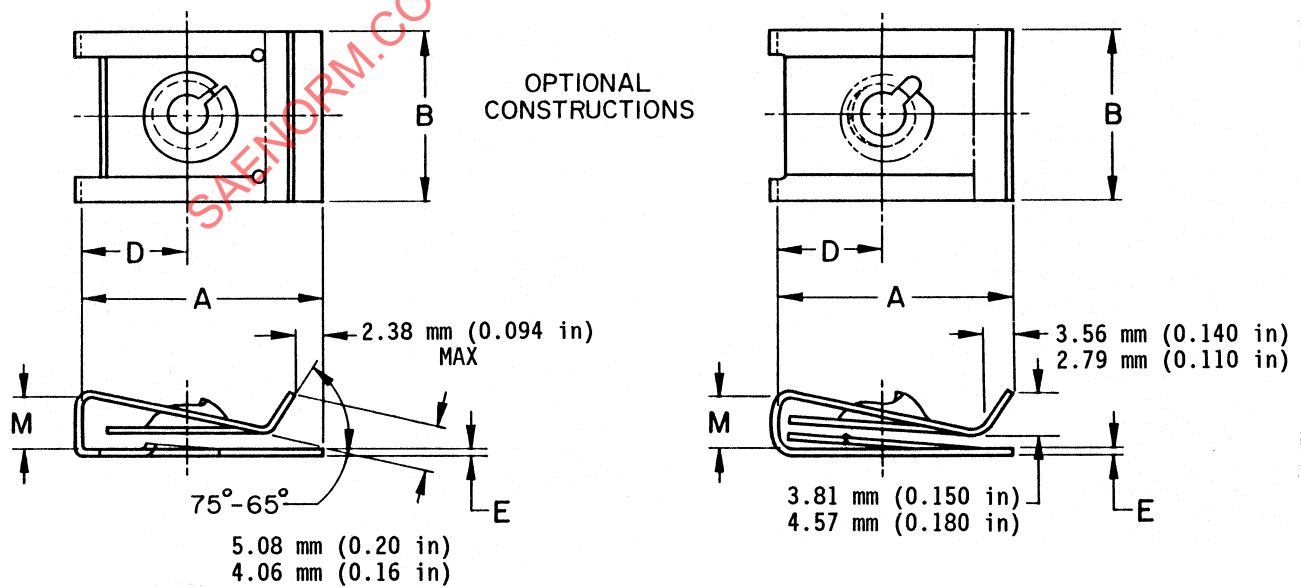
U SHAPE SHORT THREAD STYLE AND LONG THROAT STYLE
